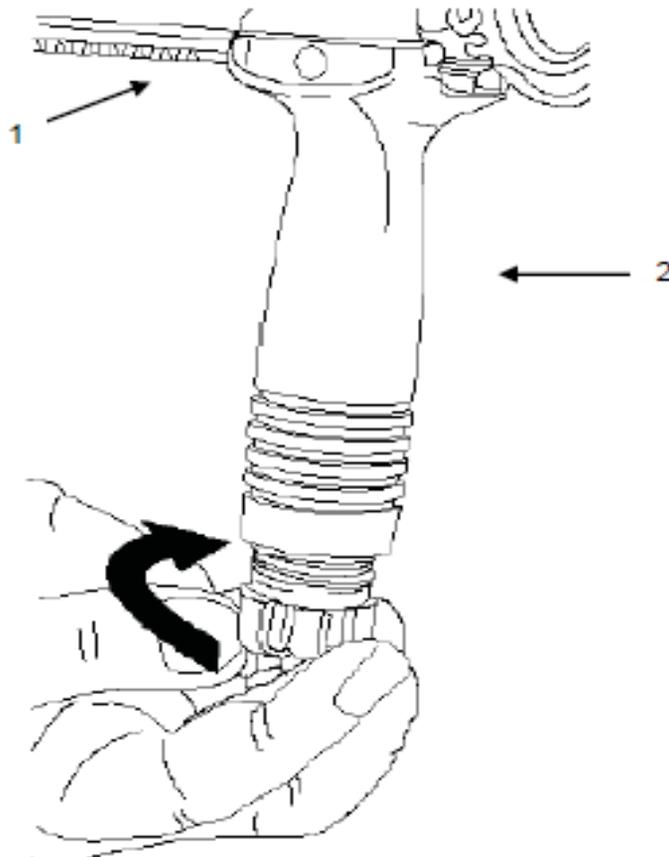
O-Ring Clutch, Hand Grip, Rail.
